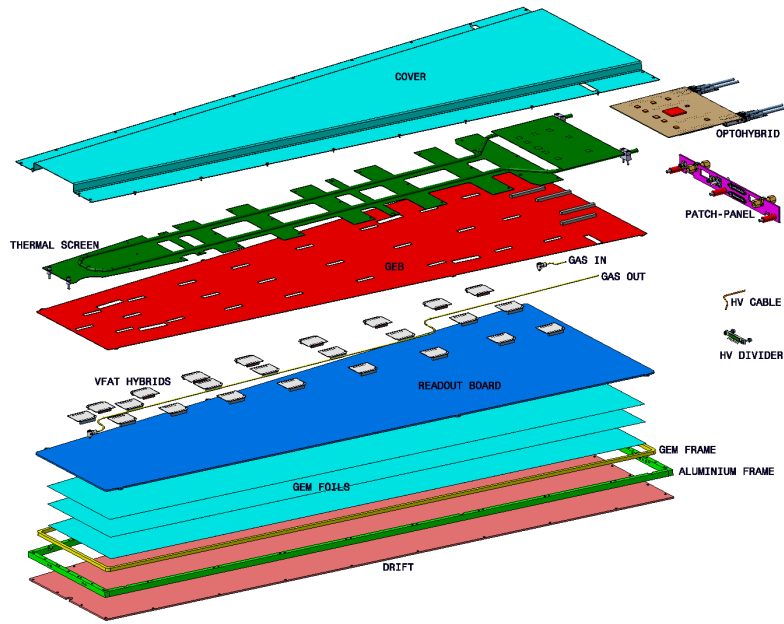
GE1/1 Triple-GEM exploded view
